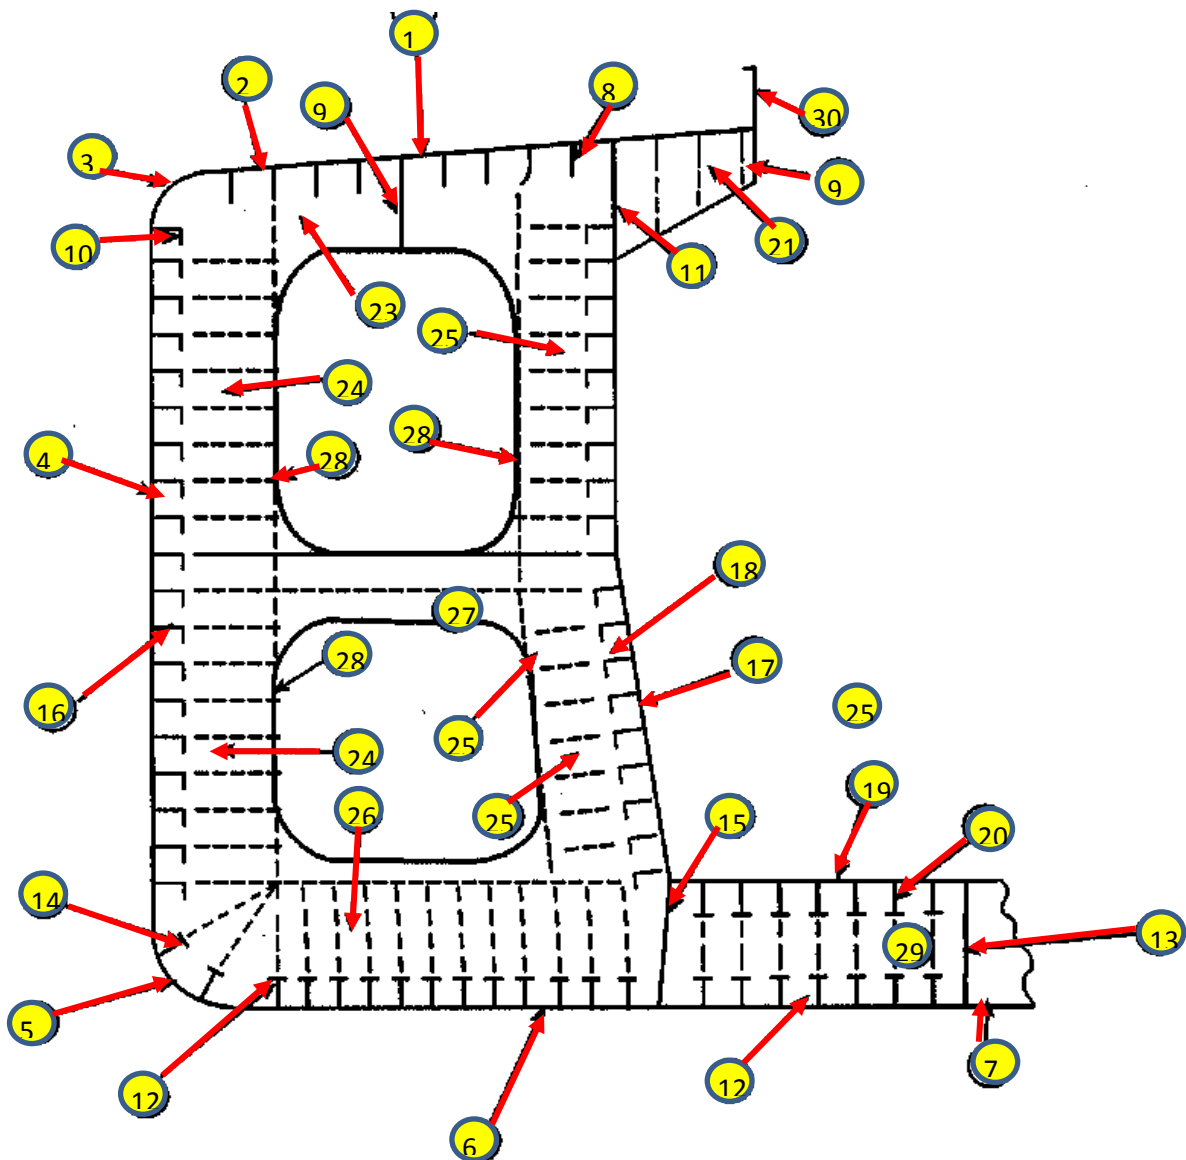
SINGLE HULL ORE CARRIER & OIL TANKER
